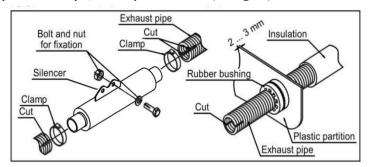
Attachment of the exhaust pipe to the heater and the use of a rubber bushing
